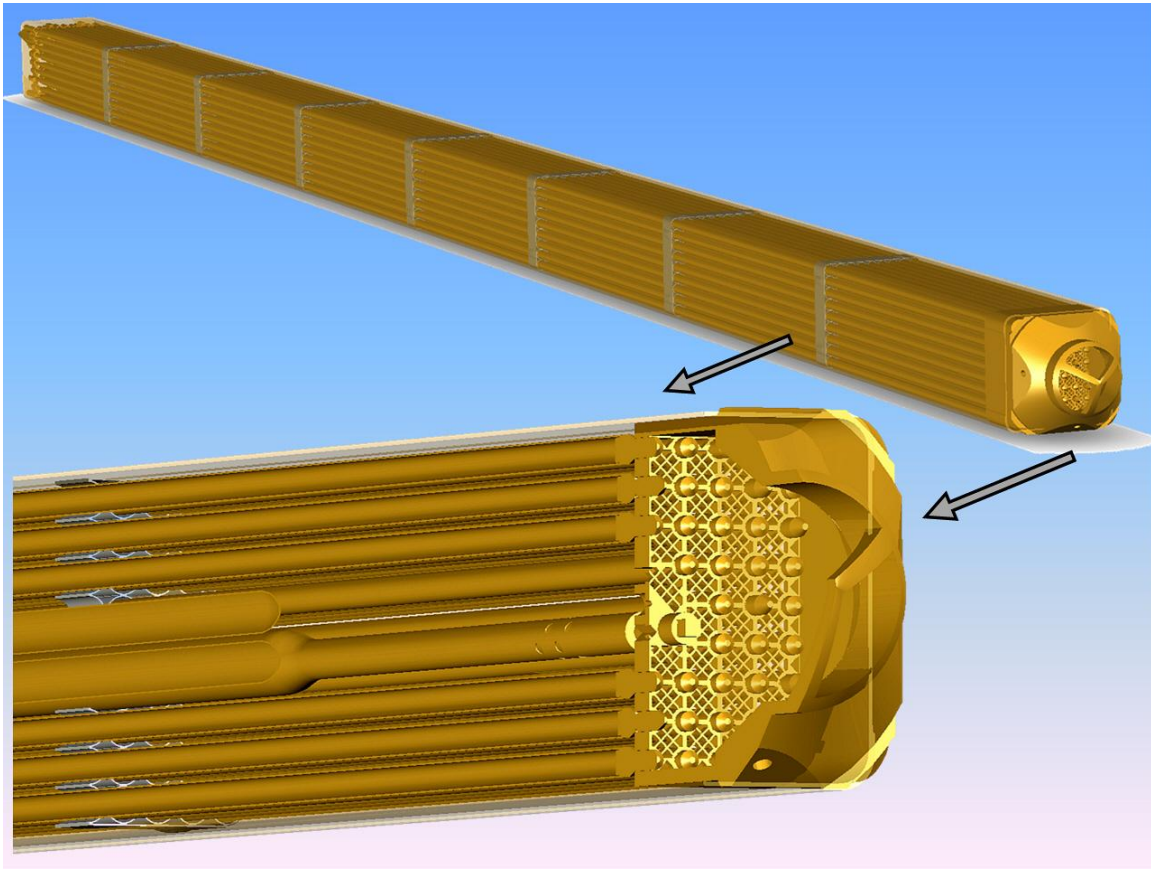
CAD solid model isometric and cross-sectioned views of the complete BWR fuel assembly from lower tie plate perspective.
